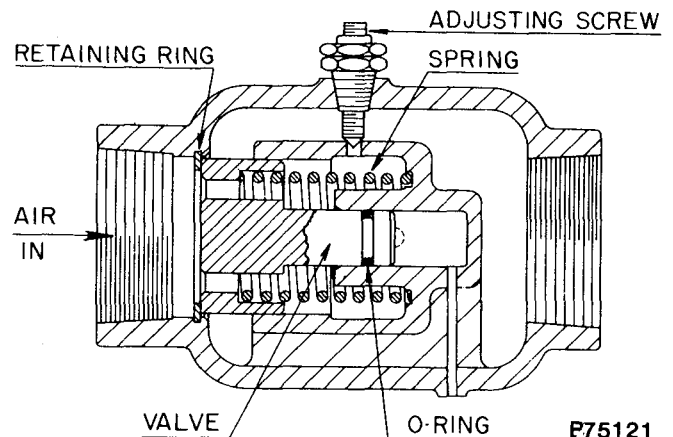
MINIMUM DISCHARGE PRESSURE VALVE
